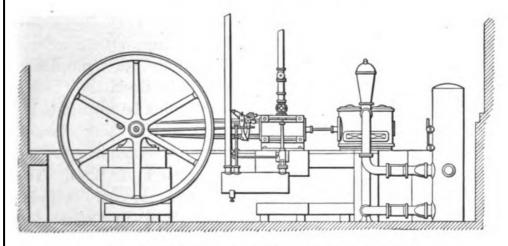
Horizontal Fly Wheel Pumping Engine.
